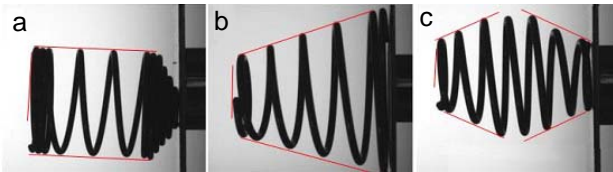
Different spring types (a: cylindrical spring; b: single-conical spring; c: double-conical spring)
